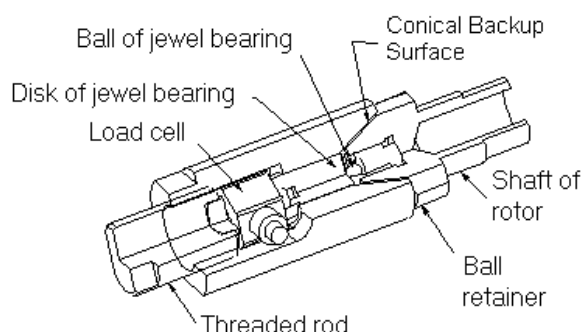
Jewel bearing assembly applied to each end of the rotor. The ball of the jewel bearing rotates against the stationary disk of the jewel bearing during operation.
